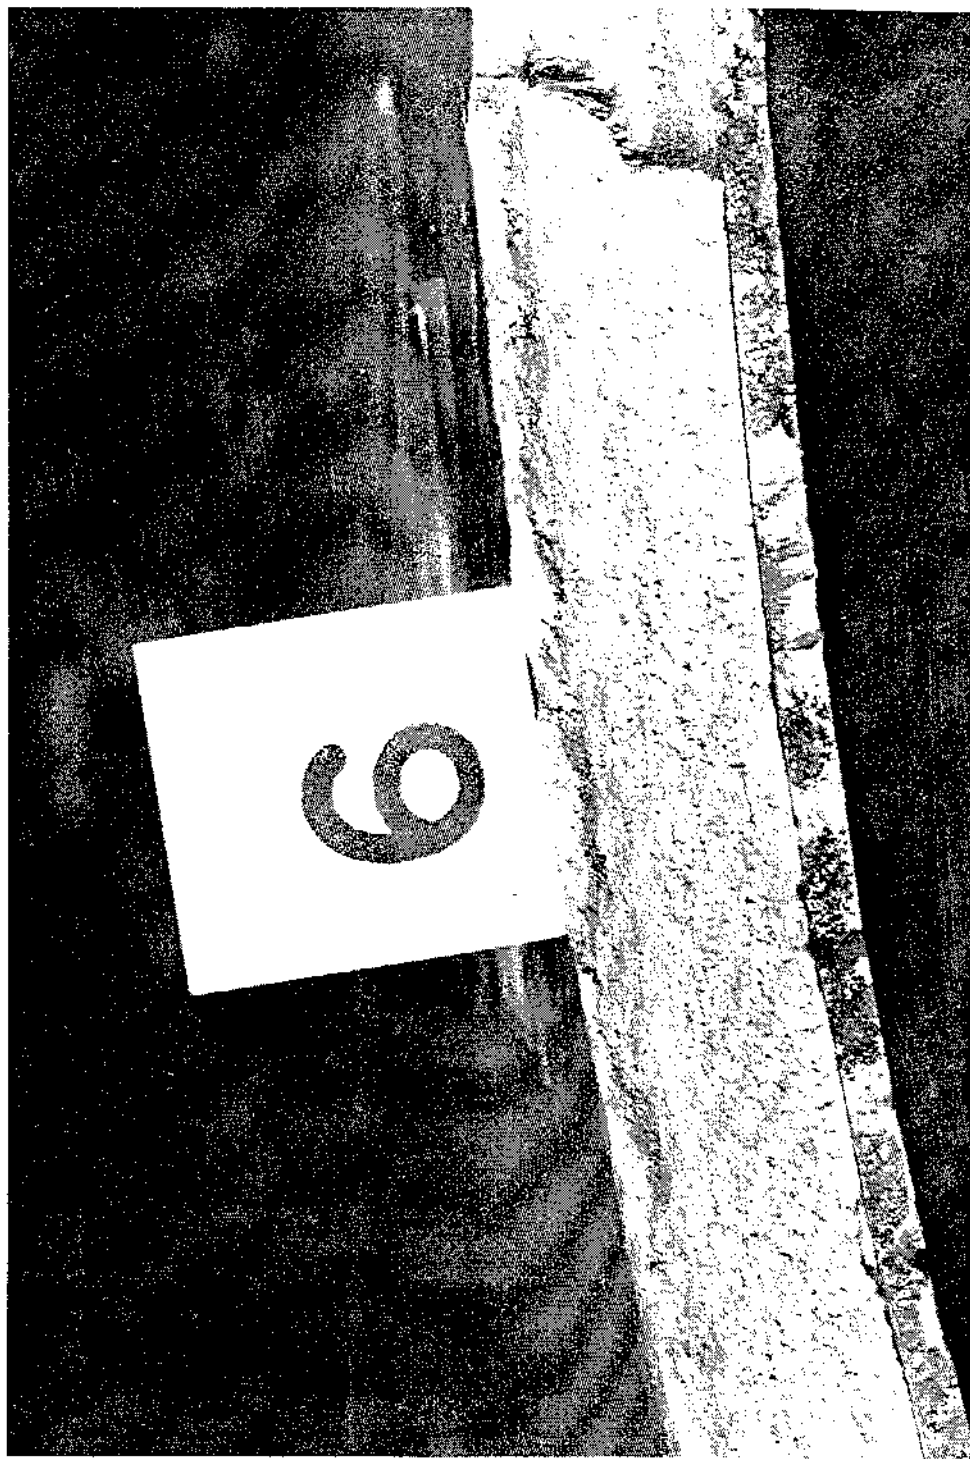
Cross section of broken weld of HK cast-alloy tube.
